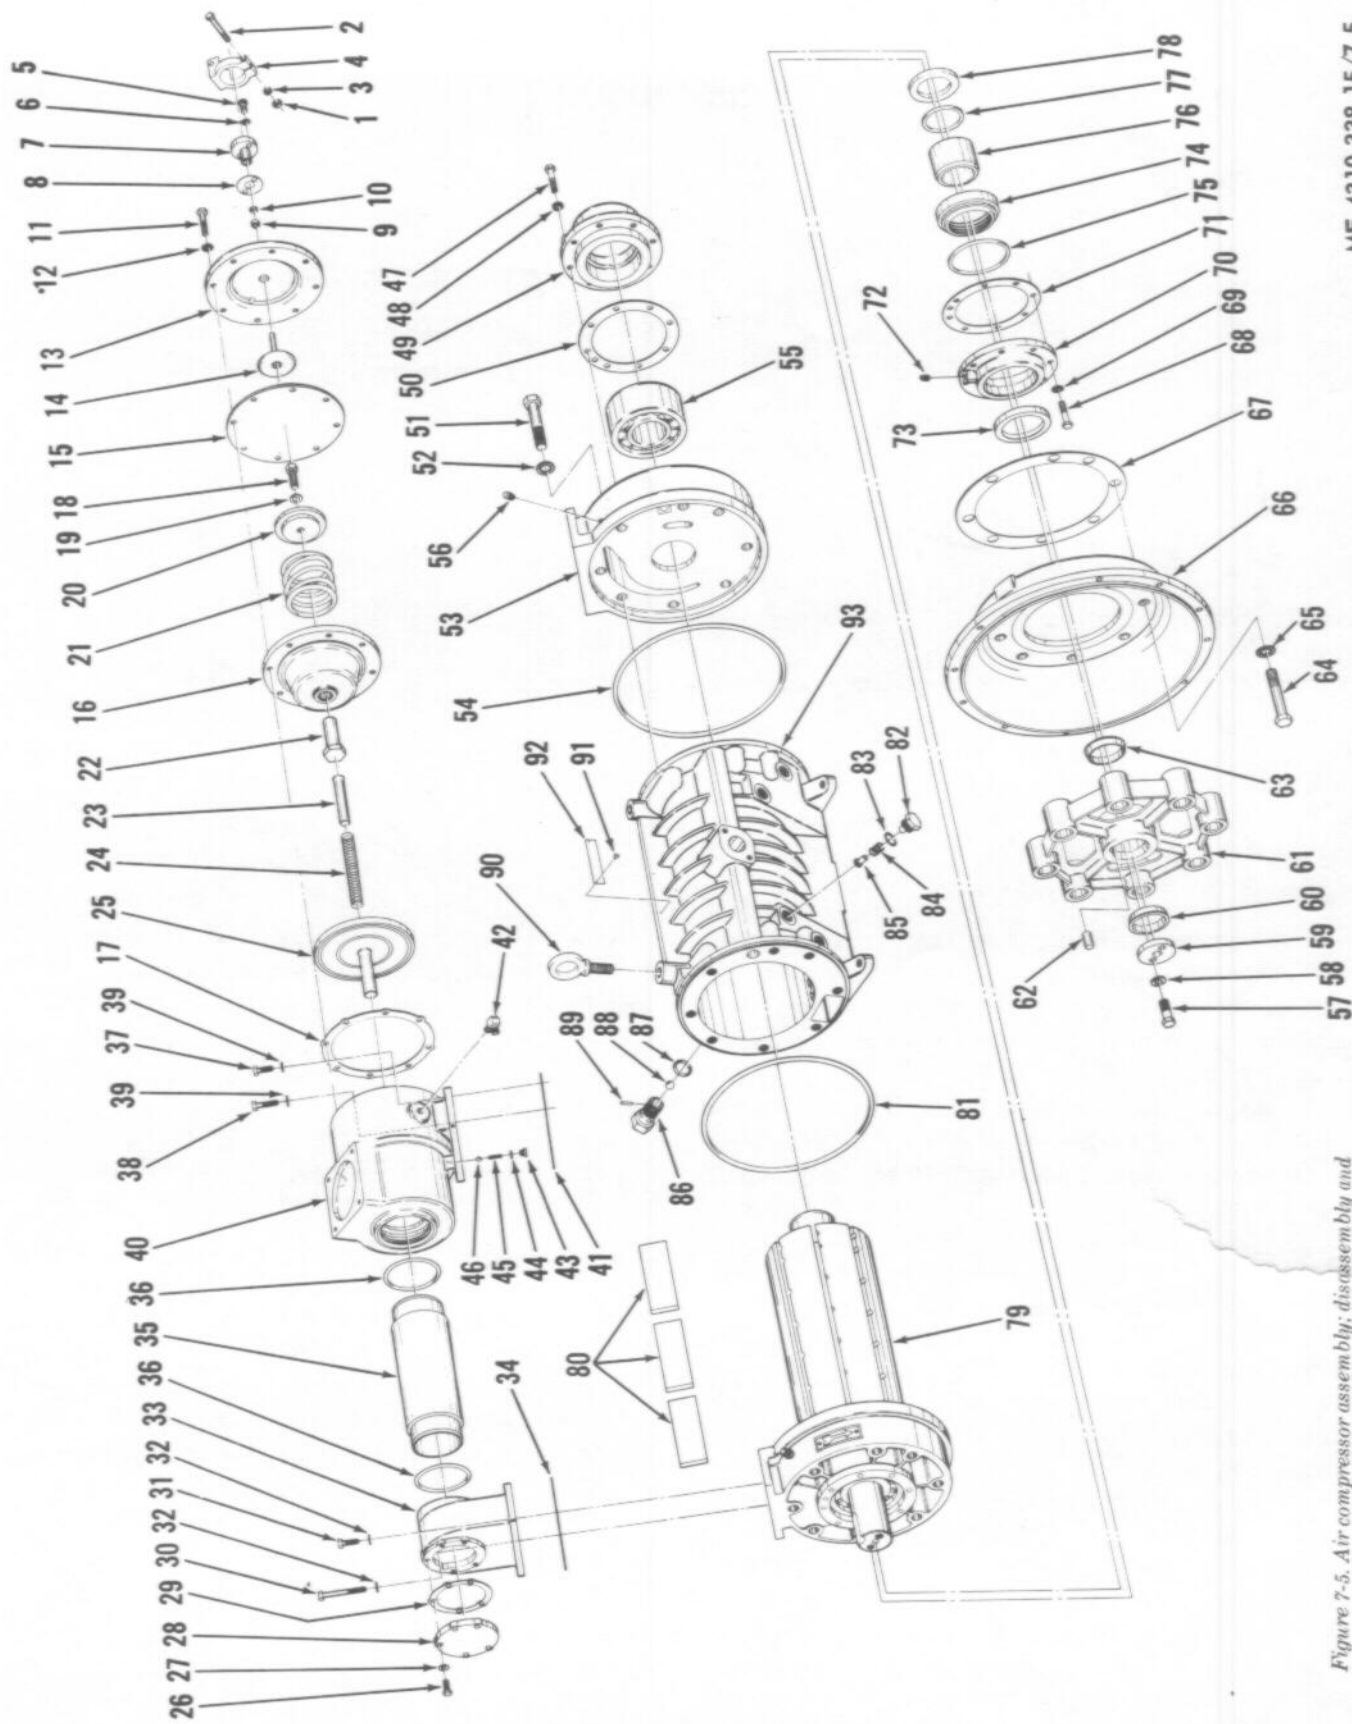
Air compressor assembly; disassembly and reassembly.
